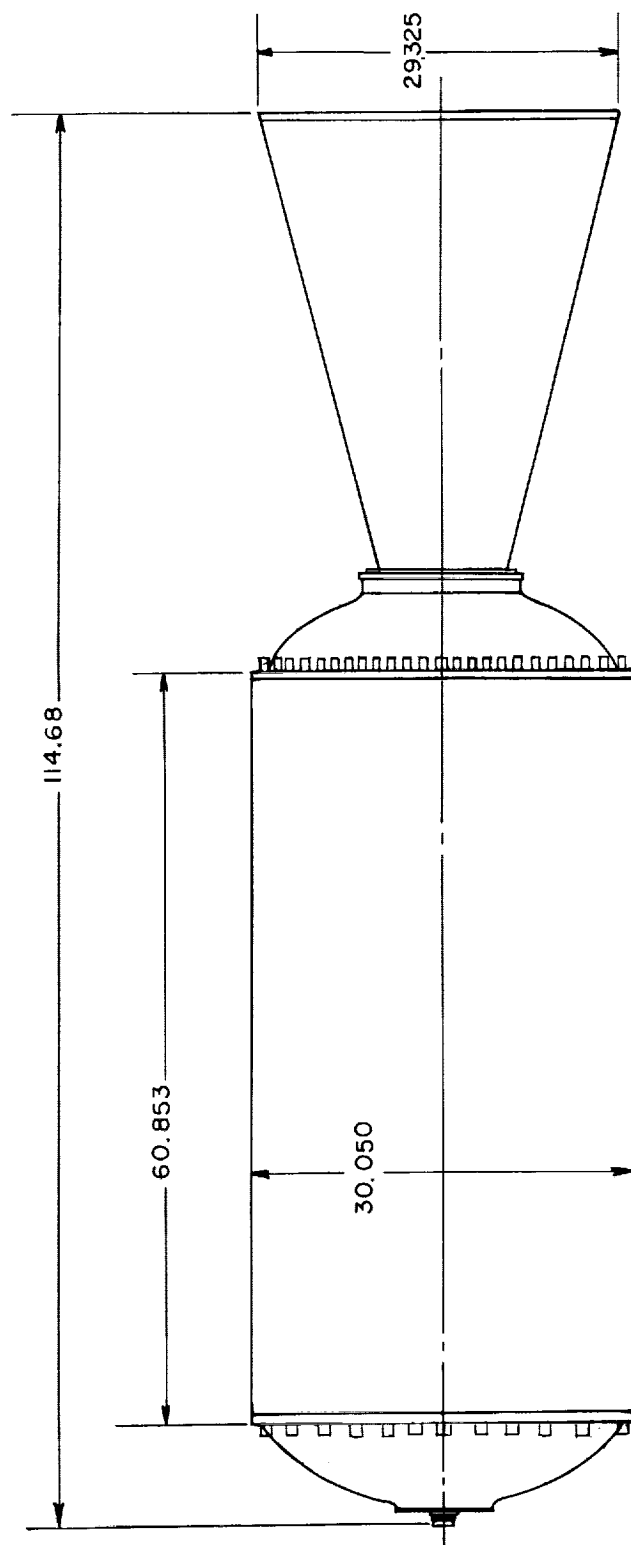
External view of Antares rocket motor. All dimensions are in inches.
